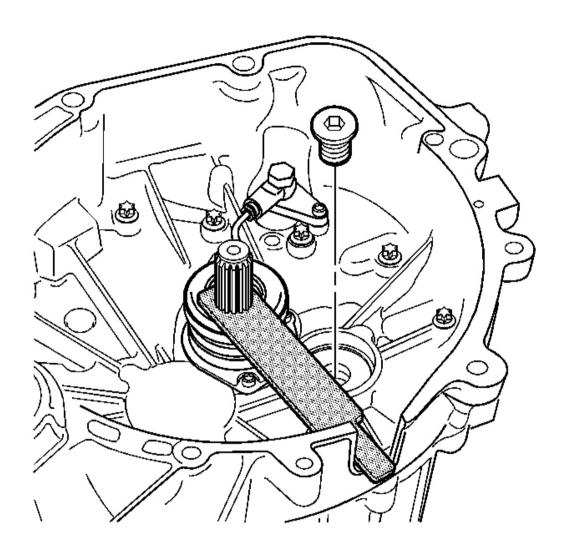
View Of Intermediate Shaft Bolt Courtesy of GENERAL MOTORS CORP.
